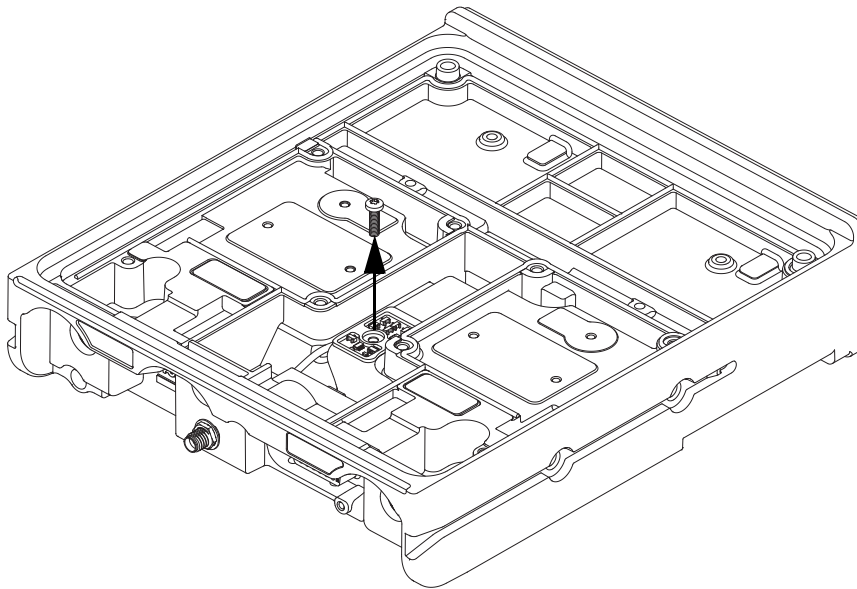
Removing the J2 Rear Accessory Connector Internal Screw
